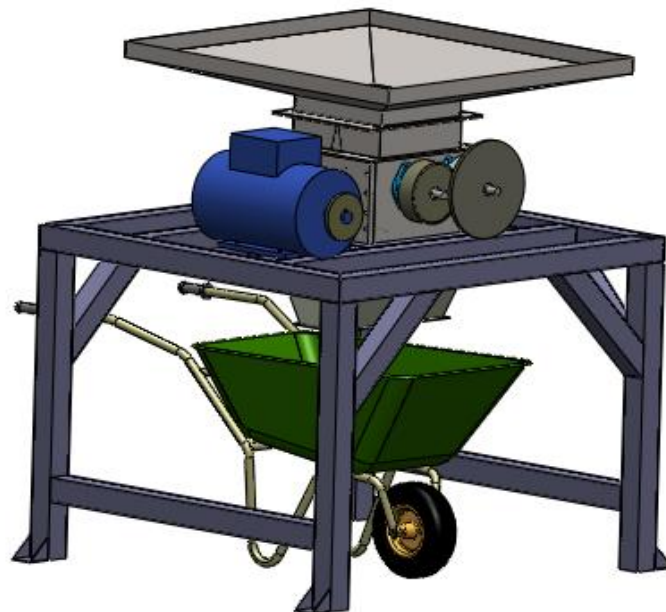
Isometric View machine grinding design with wheelbarrow
